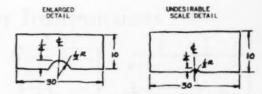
Enlarge small details on larger parts for clarity when necessary.
